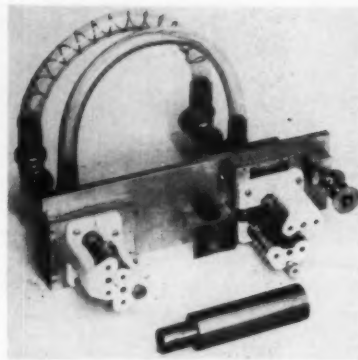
Air squeegee kit, Unicorn Engineering Corp.
